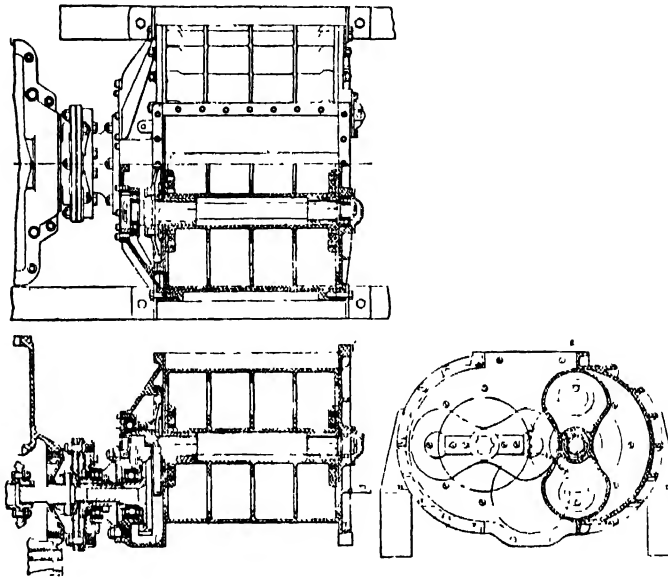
Sectional Views of Root Blower for Liberty Engine Supercharging.
